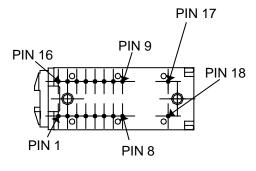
KC4210PCB Receptacle Orthographic Drawing
